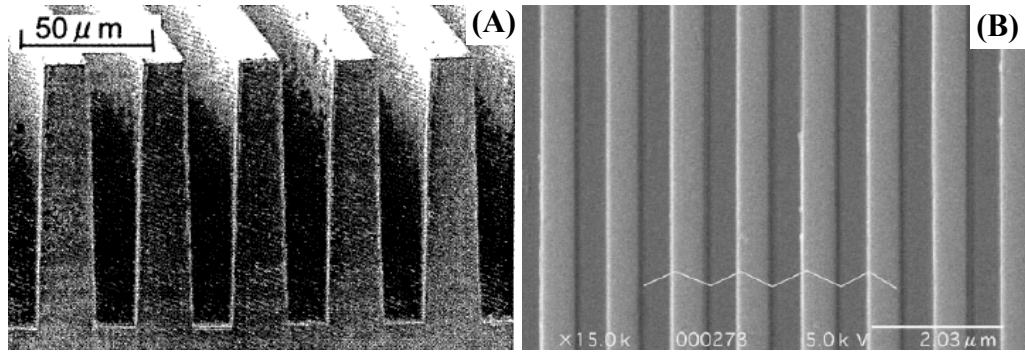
Trapezoidal grooves [14] (A), and v-grooves [15] (B) formed by micro-fly cutting
